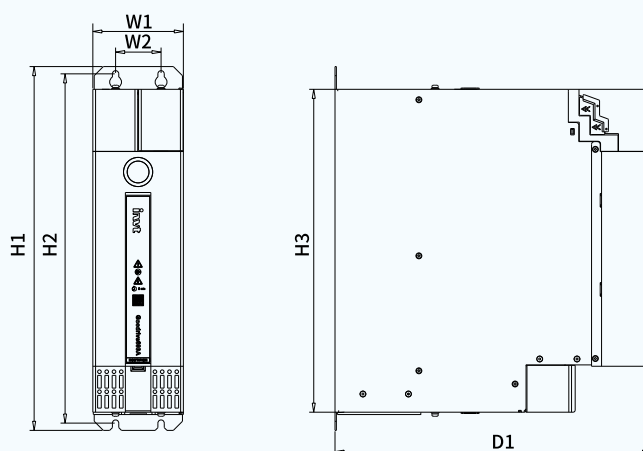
Wall mounting drawing for the 380V 45kW rectifier unit
